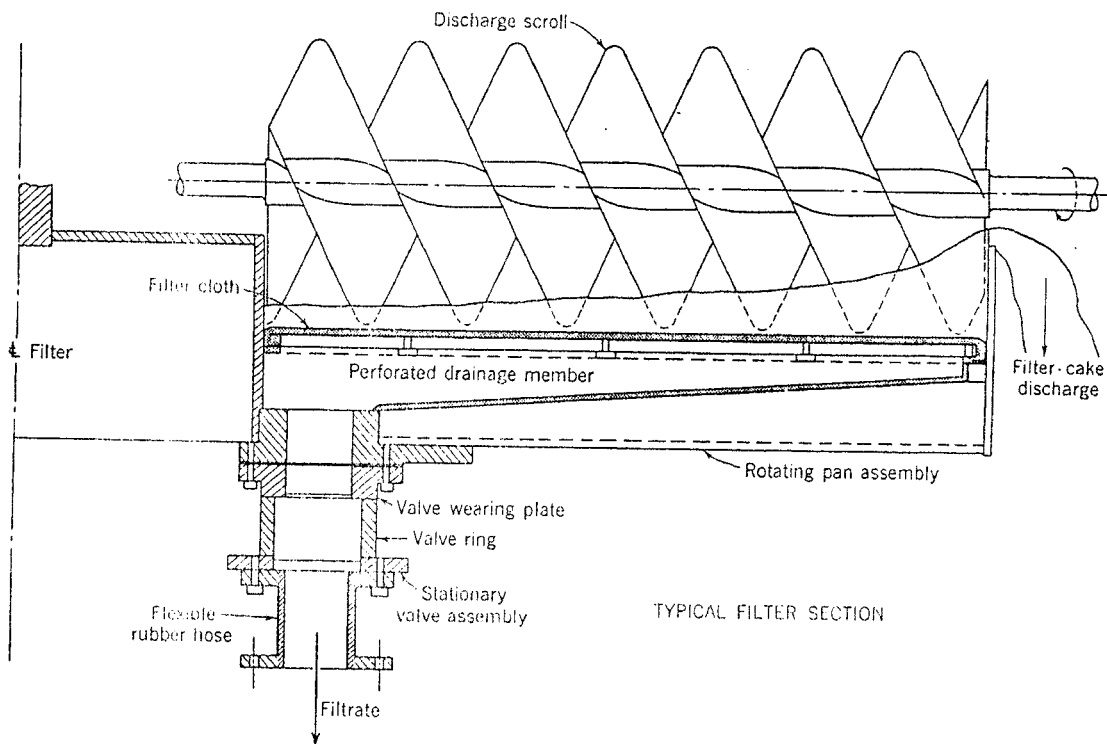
Cross-sectional view of a rotary horizontal vacuum filter showing filtrate-removal system, filter cloth, and discharge scroll. (Courtesy Filtration Engineers Division, American Machine and Metals, Inc.)
